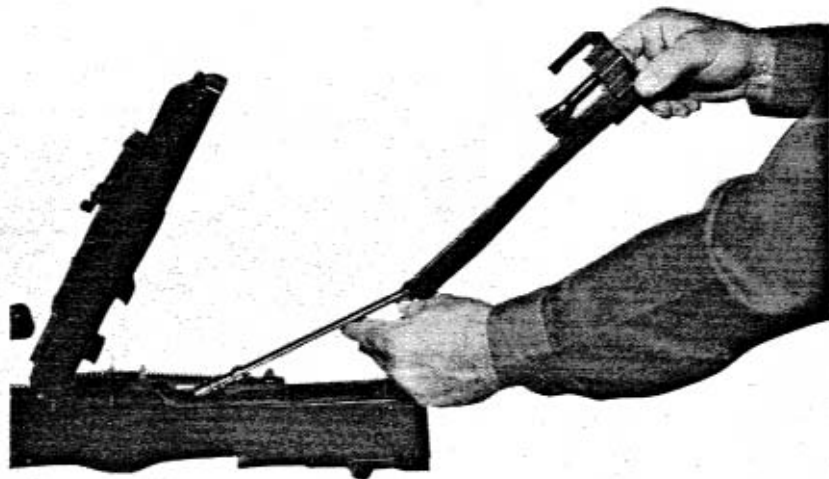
CARRIER BLOCK AND BOLT REMOVED
